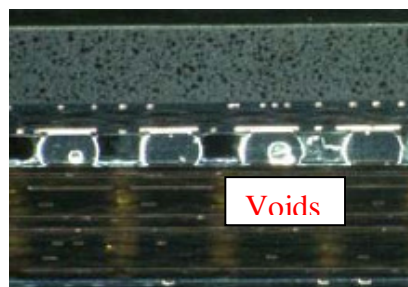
Schematic cure SMT 256 or SMT 266 encapsulated solder joint
